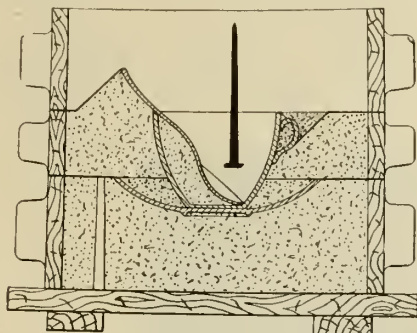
MOLD READY TO HAVE DRAG RAMMED UP.
